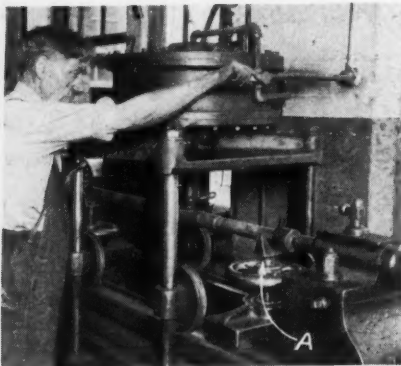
Straightening rough crankshafts for Gordon printing presses.
